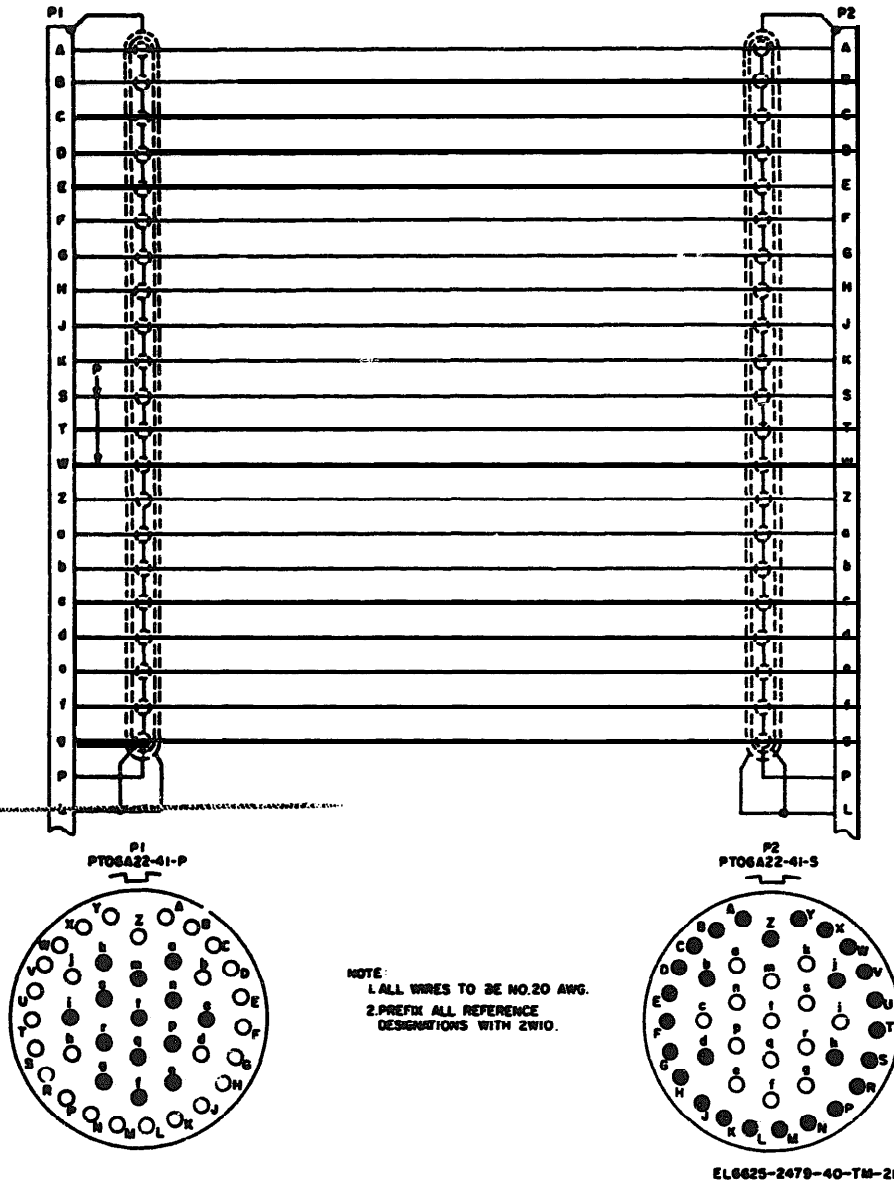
Cable Assembly, Special Purpose, Electric CX-12722/AYM-3, wiring diagram
